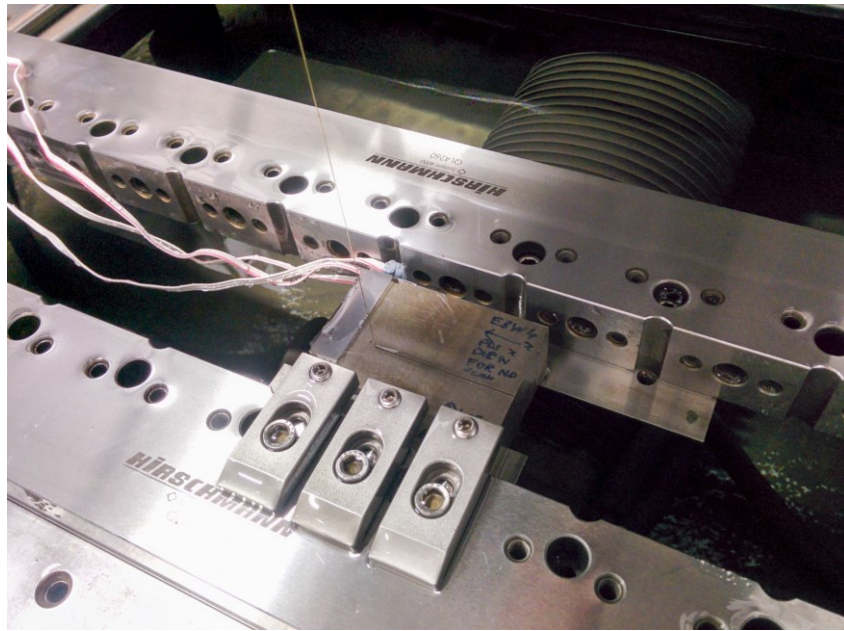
EBW4 C(T) blank during cutting for residual stress measurement by slitting
